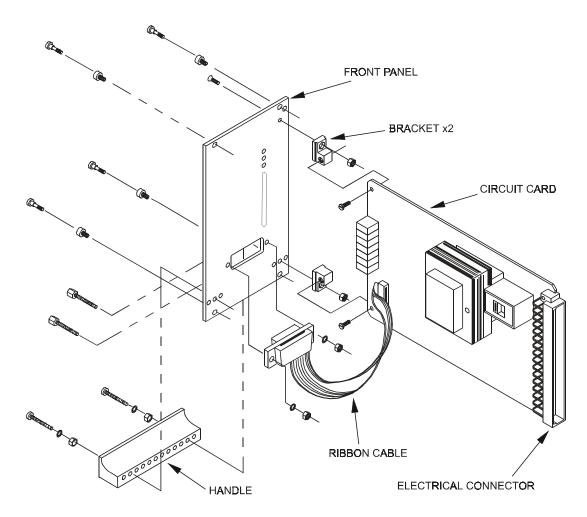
TI-11 INDICATOR- EXPLODED VIEW
